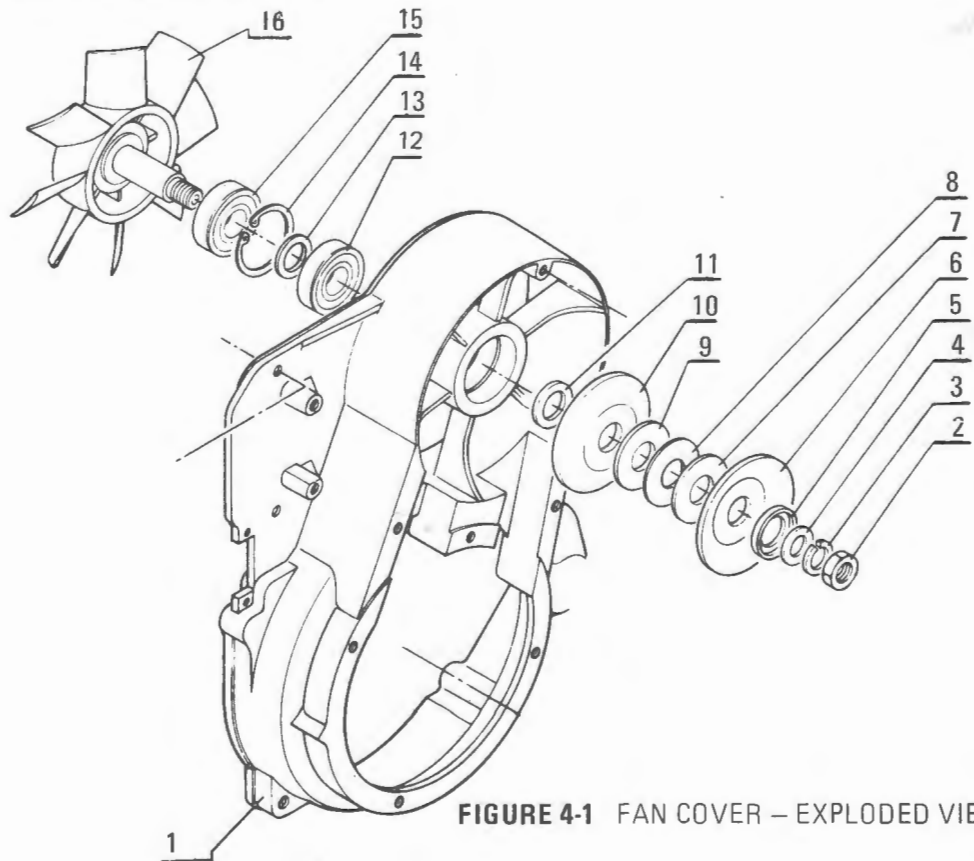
FAN COVER - EXPLODED VIEW
